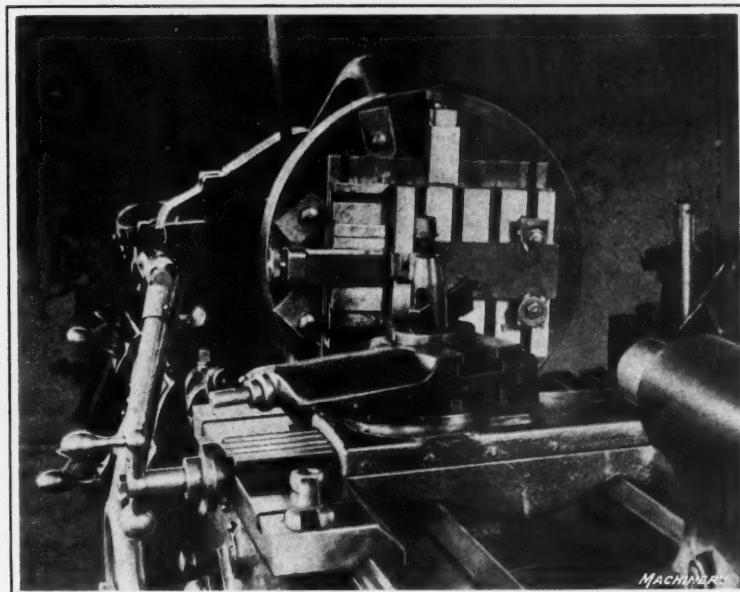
Compound Slide used on a Lathe by attaching it to the Faceplate
